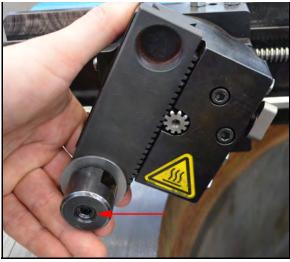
LOCATION OF SWIVEL CLAMPING SCREW
